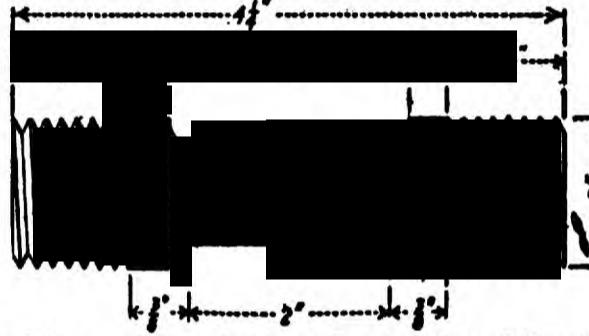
Standard Form of Test Specimen Required for all Tension Tests of Steel Casting Material.
